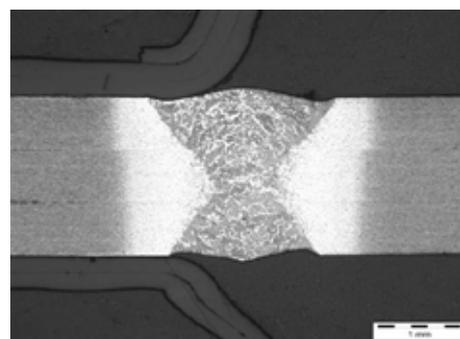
Laser welded 3 ply titanium skin lap joint (Images courtesy of TWI and IPG Photonics) - laser seam stepper welding.
